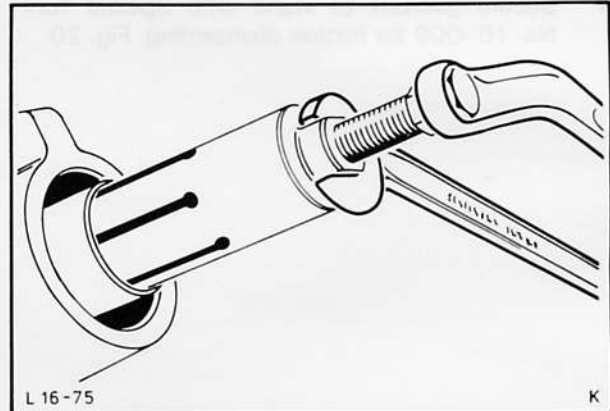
Extract extension housing bush with Special Tool No. 16-025
